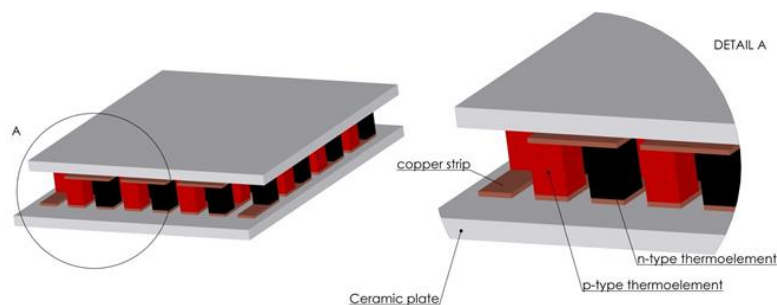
A schematic outlining the particular components in the standard module design with ceramic plates on the top and bottom of the module.
